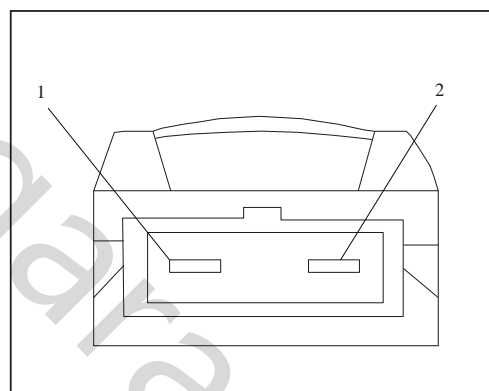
Electromagnetic fuel injecting nozzle pin
